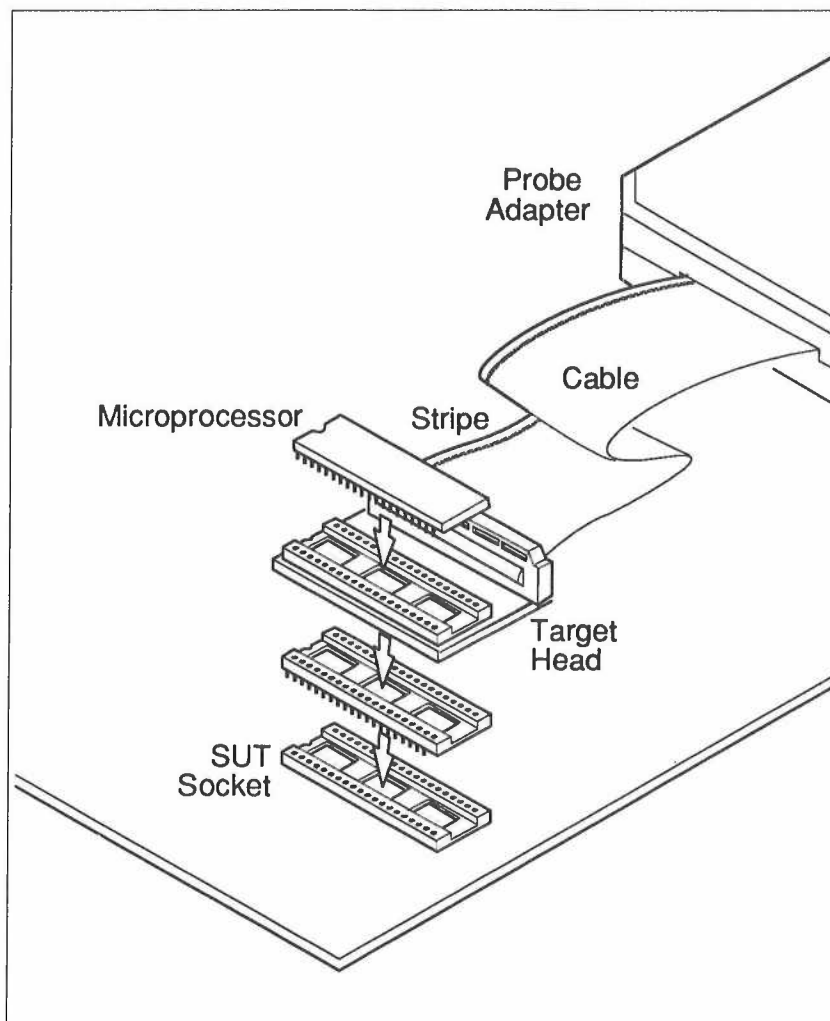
Connecting the disassembly probe adapter to a socketed DIP.
